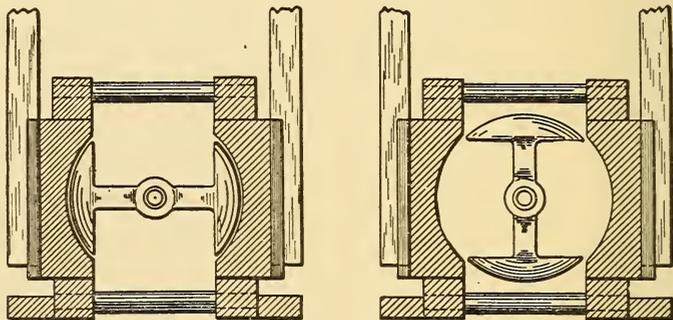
DETAILS OF GENERATOR POLE-PIECES.
